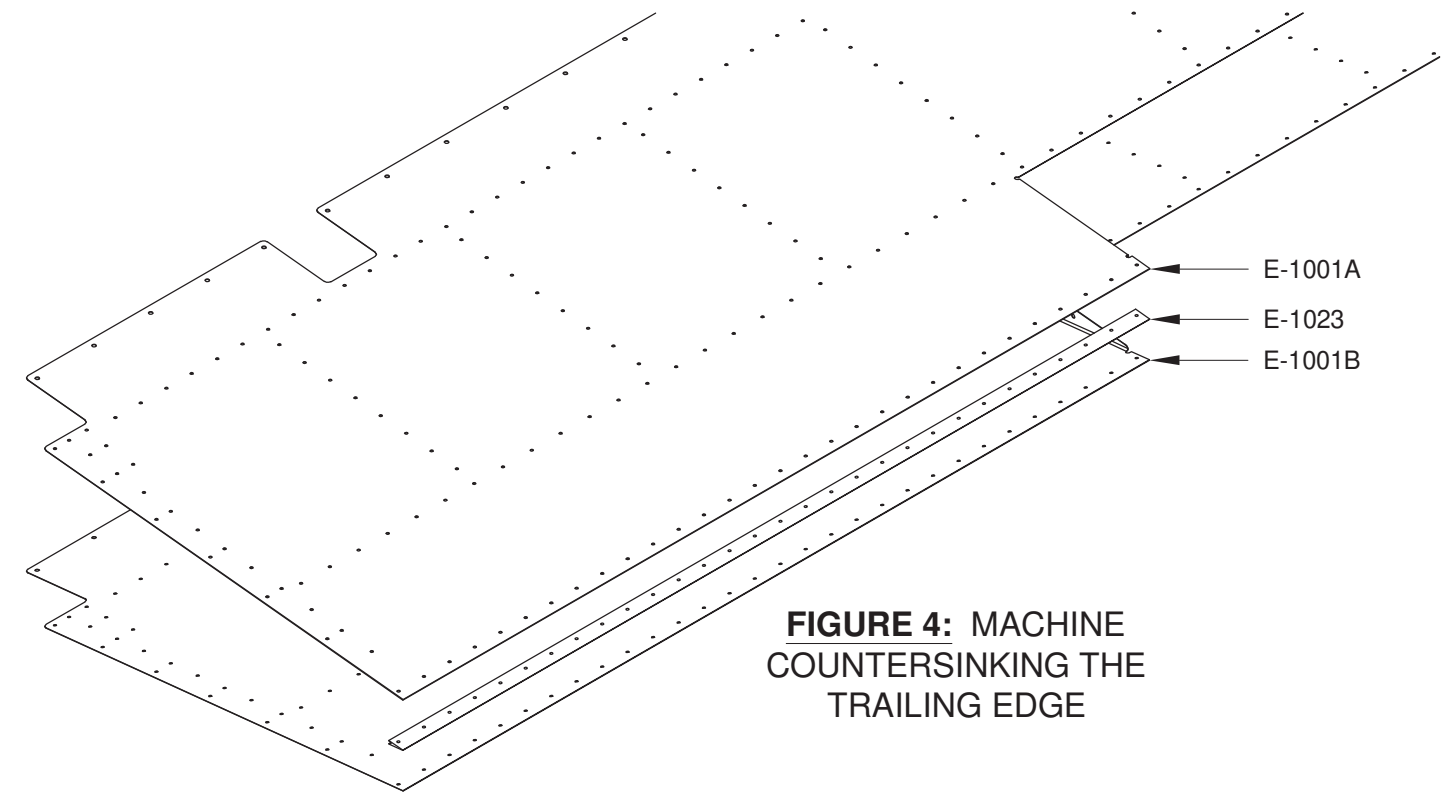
MACHINE COUNTERSINKING THE TRAILING EDGE
